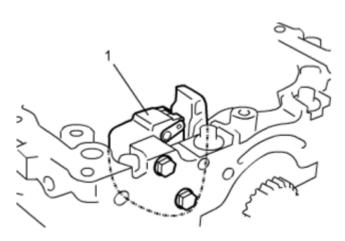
Identifying Oil Pump Chain Adjuster Courtesy of SUZUKI OF AMERICA CORP.
